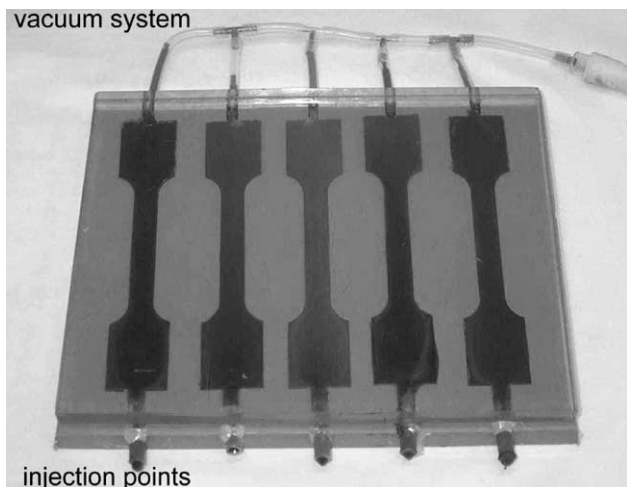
Set-up used to mould adhesive samples for mechanical testing.
